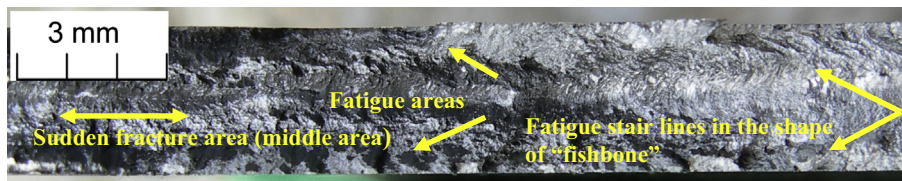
Optical view of the fracture surface in the direction of the cross section of the AA1100 (T) specimen.
